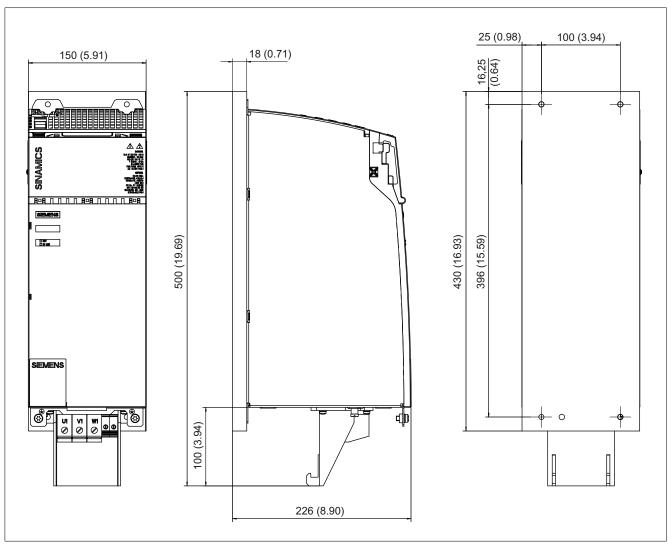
Dimension drawing of 40 kW Basic Line Module with cold plate, all dimensions in mm and (inches)
